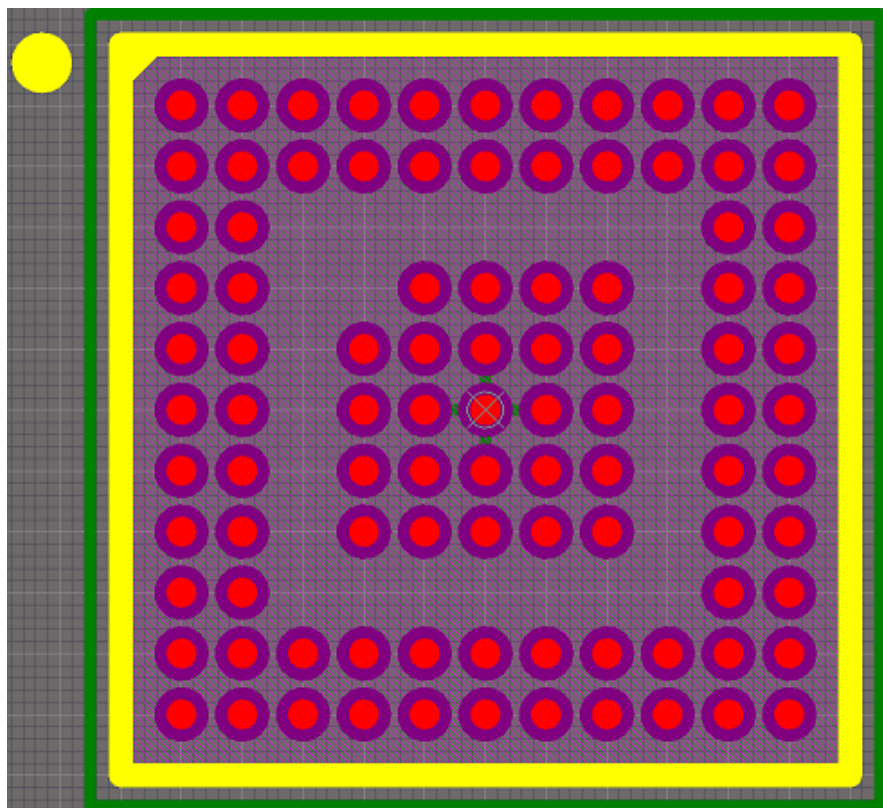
Top View Standard TPS65983B Footprint (Circular Pads)
